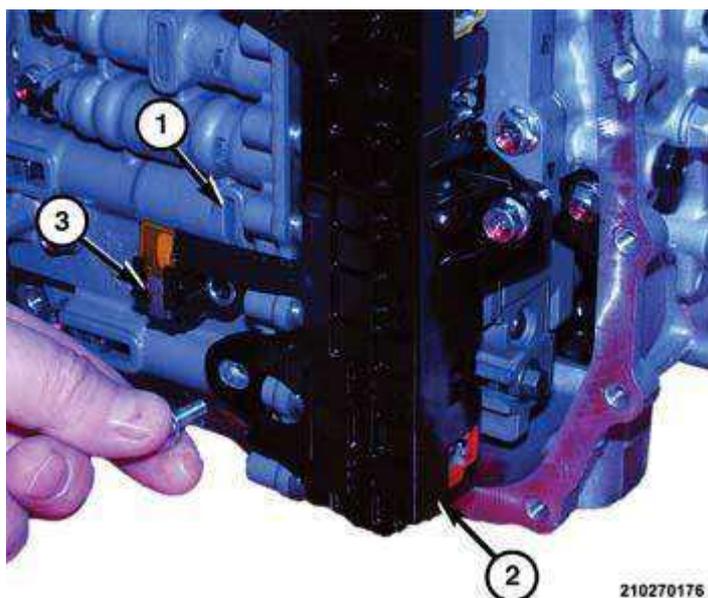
Solenoid Valve Connector, Valve Body & Bolts
